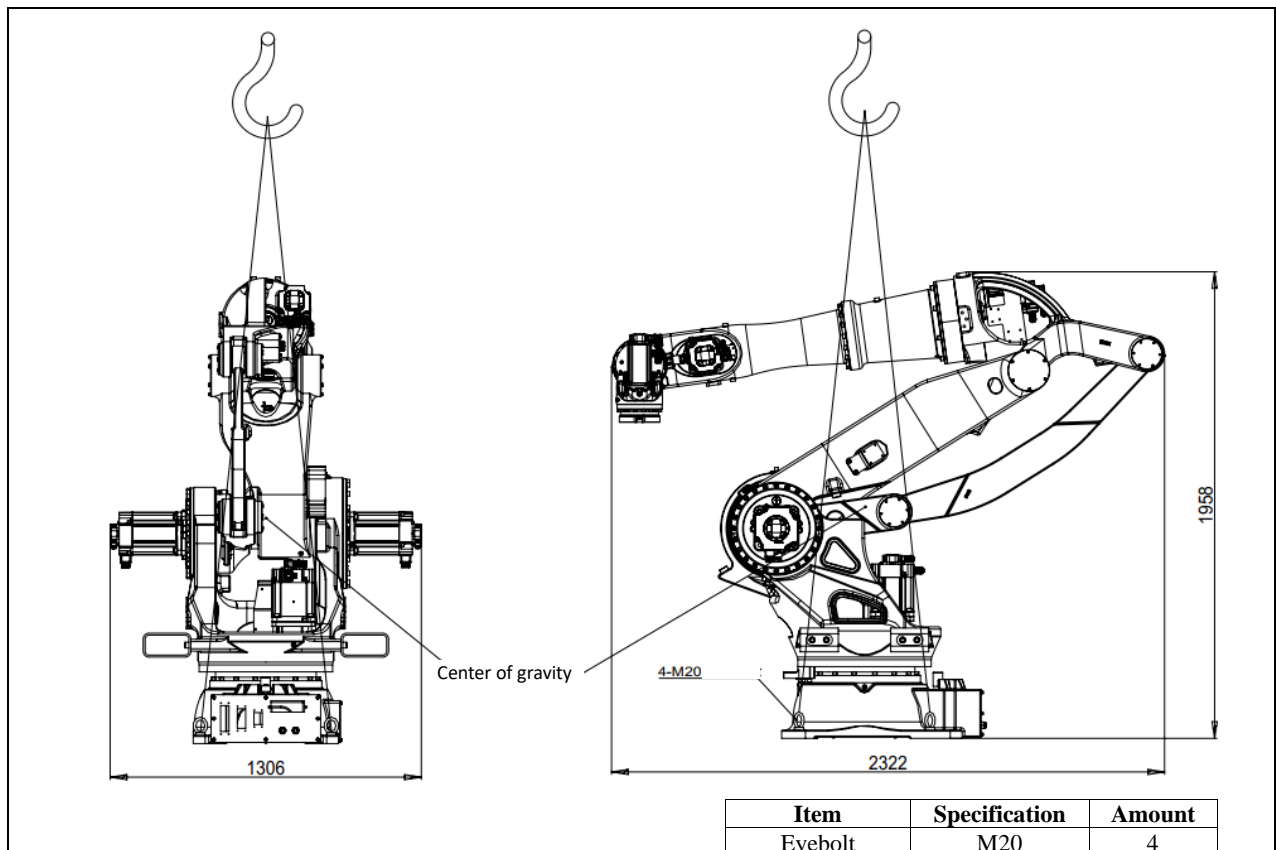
Use a crane to transport the robot (ER220-3200, ER280-3200, ER280-3200-LI)
